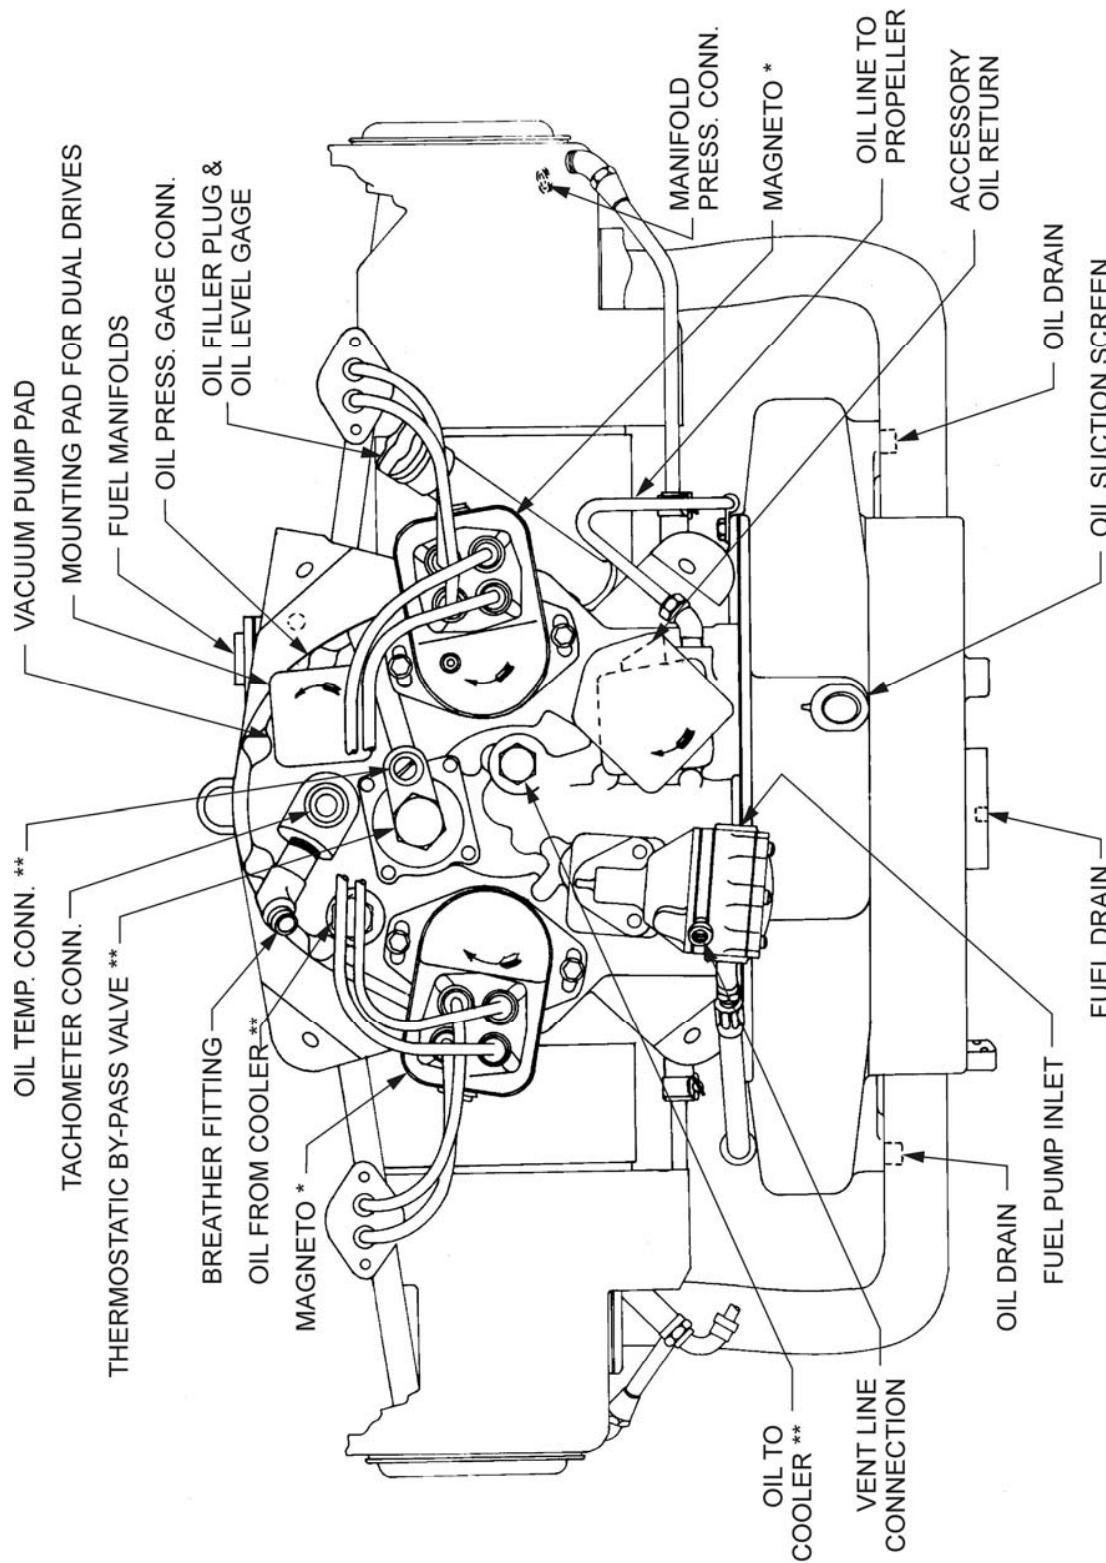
Installation Drawing – O-360-C1B, -C1D; HO-360-B1A, -B1B
